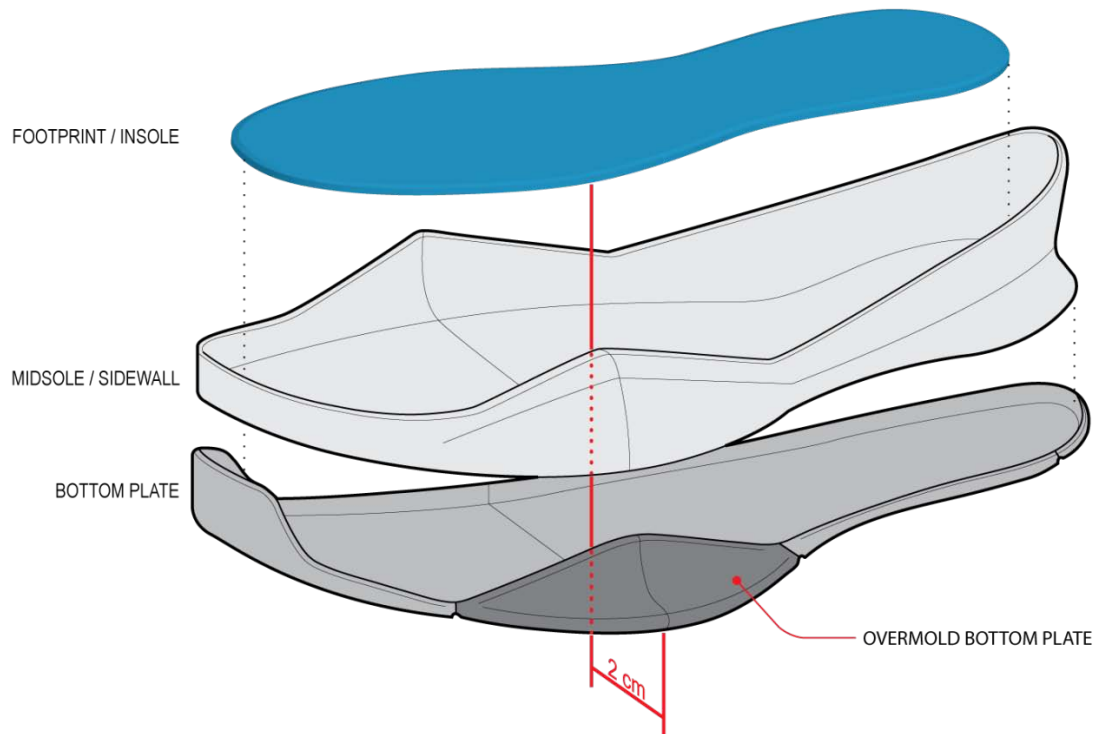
Exploded view of the insole, midsole and bottom plate interaction
